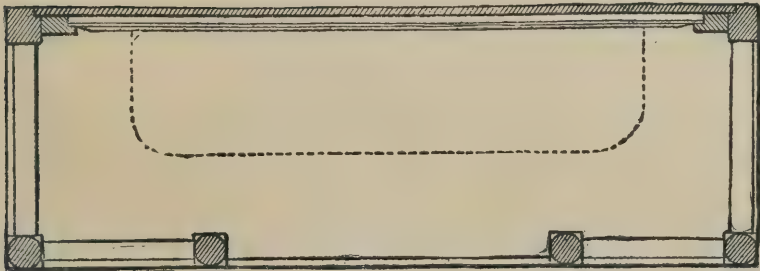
PLAN. Scale of Plan and Elevations 2 inches to the foot.
